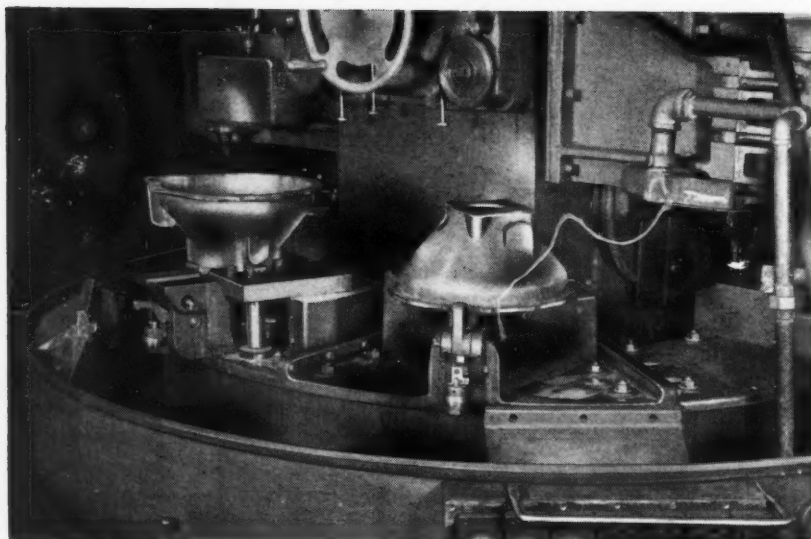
Grinding Cast-iron Transmission Cases on a Three-spindle Hanchett Machine
